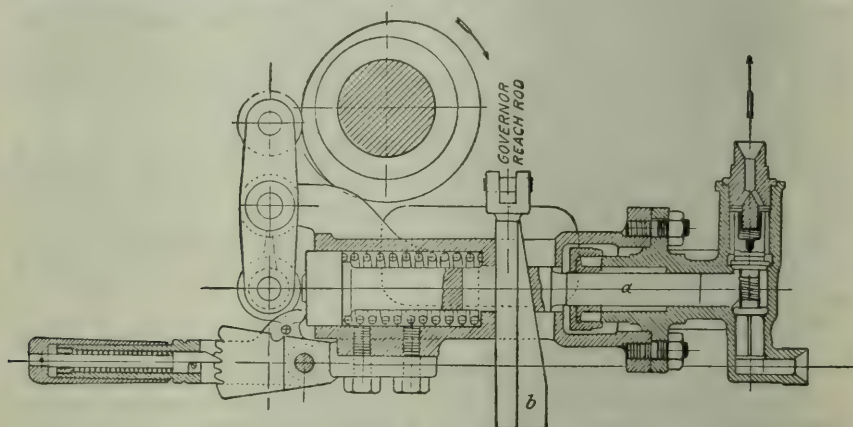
Cross section of oil pump designed to supply oil to open nozzles without opposing air pressure.
